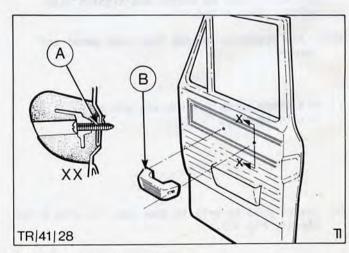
Door trim panel. A - Fastening screw B - Armrest
